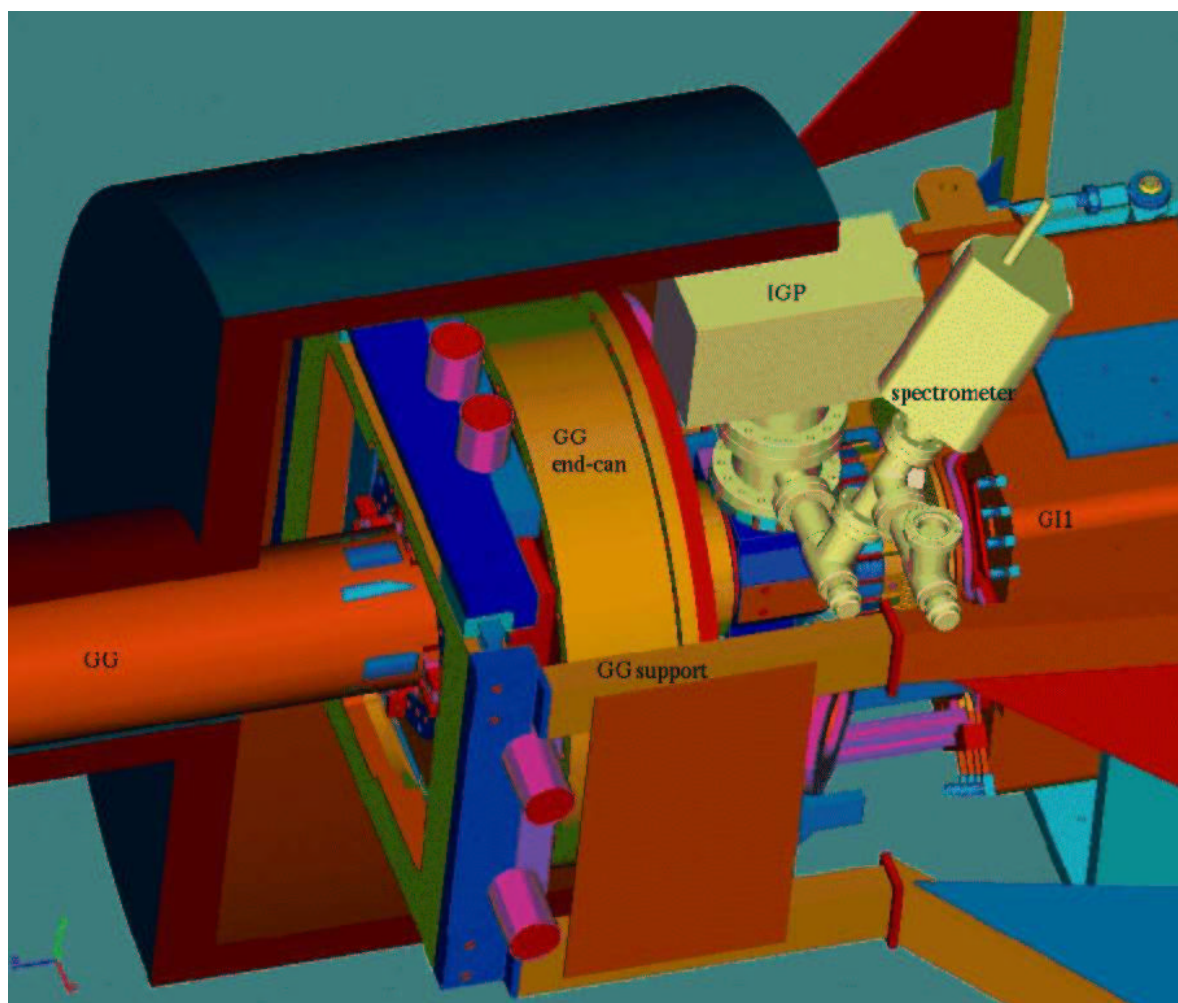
CAD drawing showing the installation of an ion getter pump and a mass spectrometer at  $z = -3.6$  m within the H1 detector.
